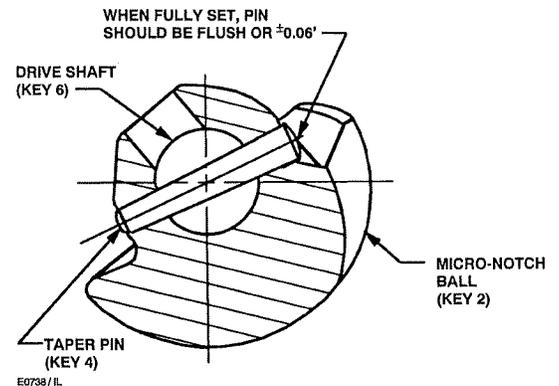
Taper Pin Installation for Design V150, V200, and V300 Size 1-Inch Valves with Micro-Notch Ball Construction
